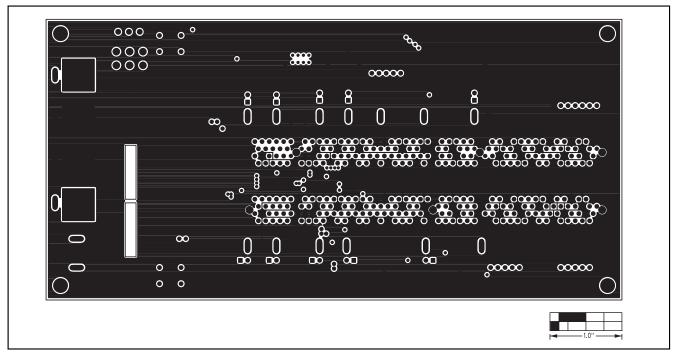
MAX5915 EV Kit PC Board Layout—Inner Layer, Ground Plane
